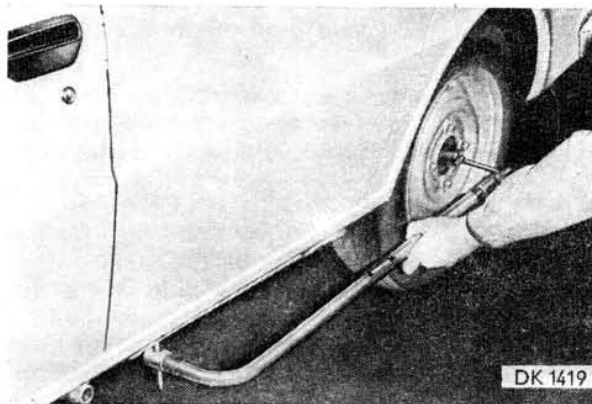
/3 - Checking Alignment of Rear Axle with Car Centre Line Using MP 8-158 Gauge
